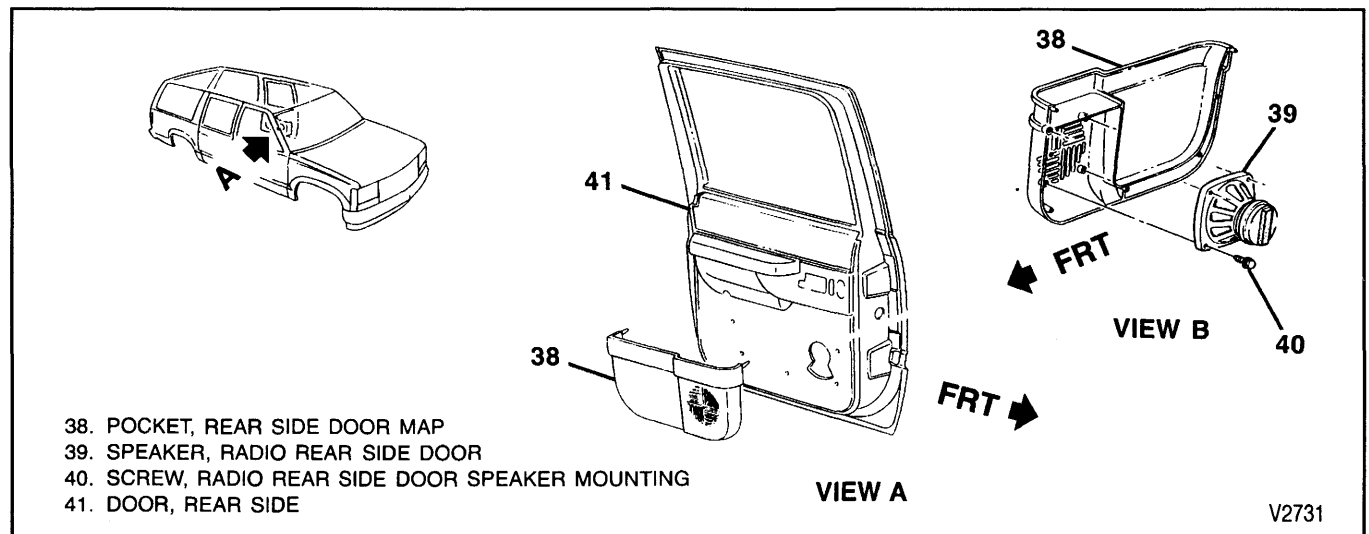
Rear Side Door Speaker Assembly (Suburban Models)
